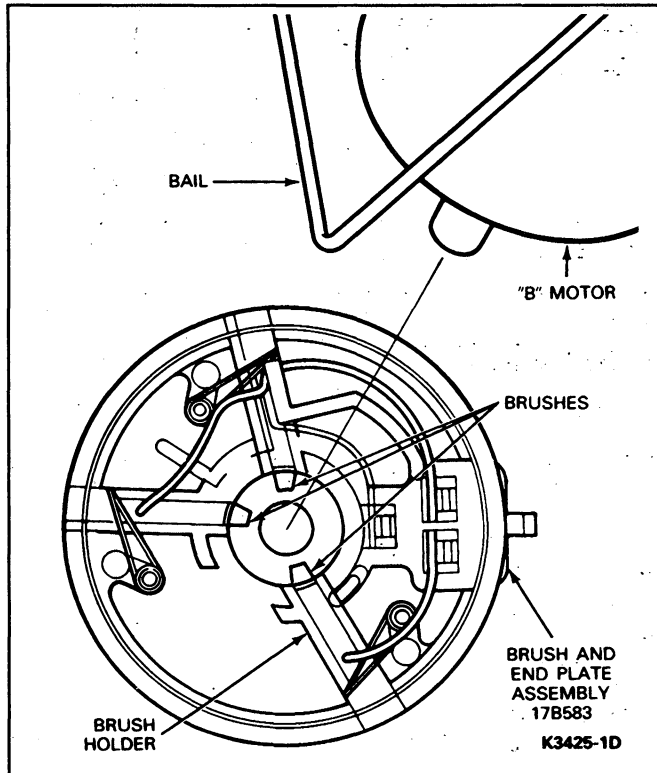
"B" Motor Brush End Plate Assembly—E-150—E-350
